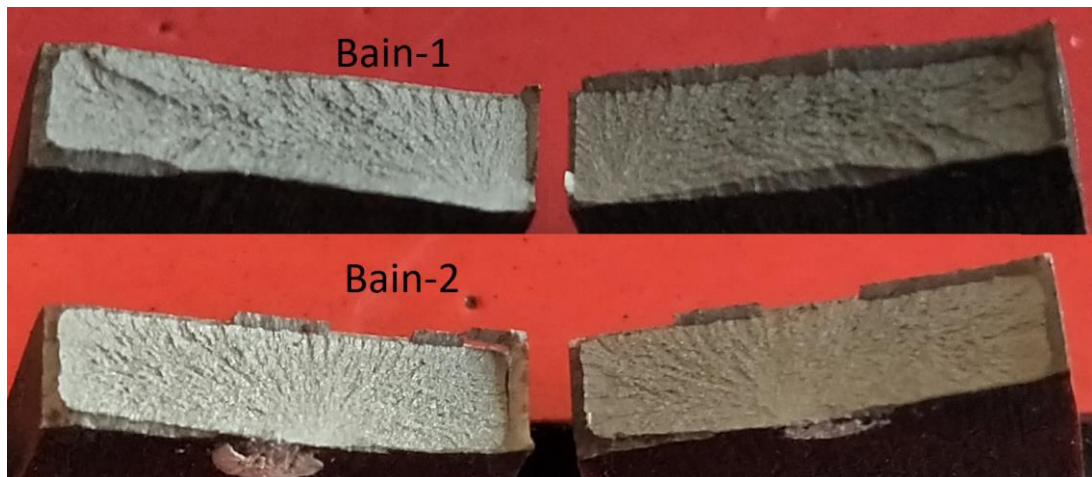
Side View of Fractured LB-250 Tensile Test Specimens
